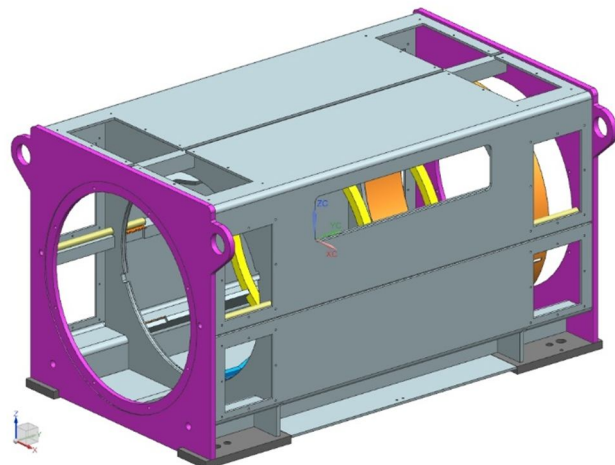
Existing Stator Frame of 500 shaft height CACA motor
